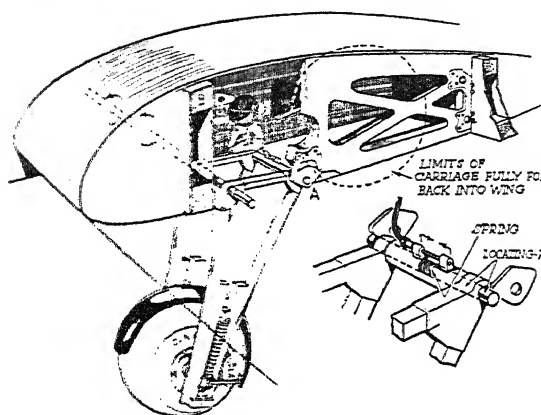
RETRACTABLE UNDERCARRIAGE, COMPER "MOUSE"
